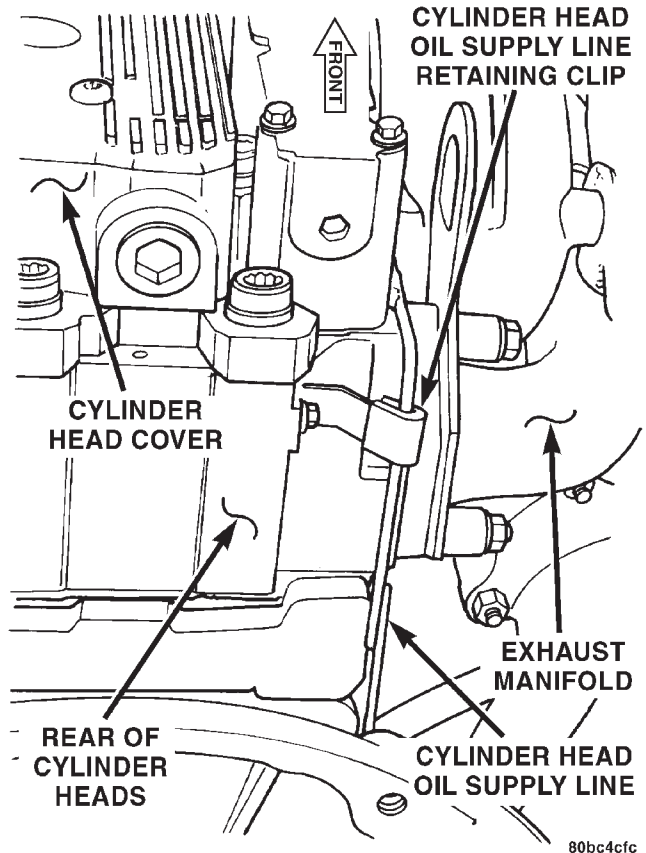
Cylinder Head Oil Supply Line Retaining Clip
